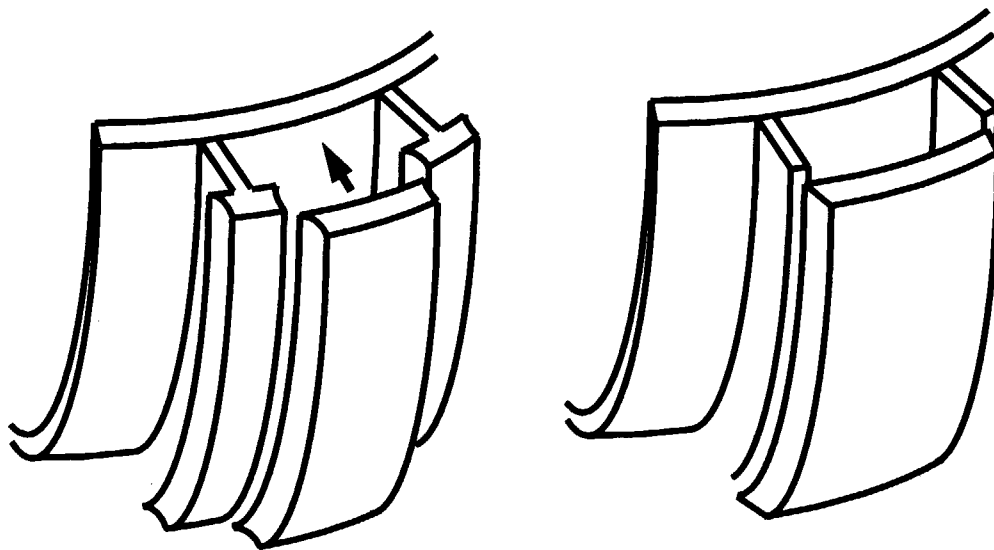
Schematic view of final weld to close double wall
